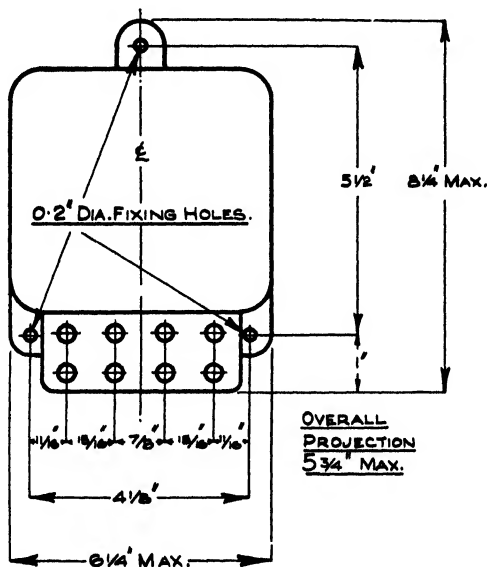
Standard dimensions for single-phase whole-current meters.
